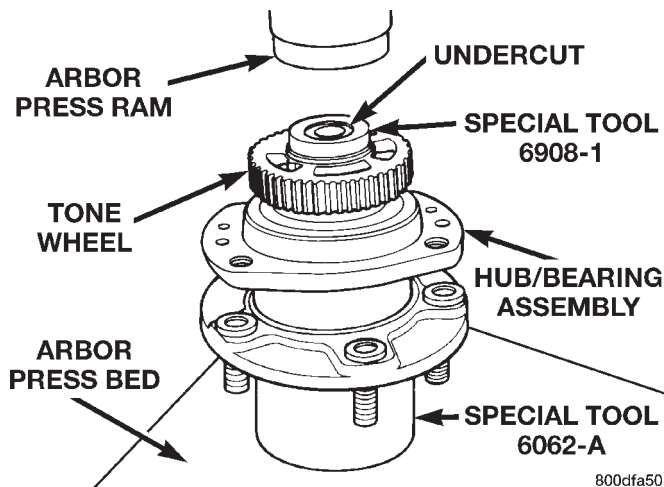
Installing Tone Wheel On Hub/Bearing Assembly
